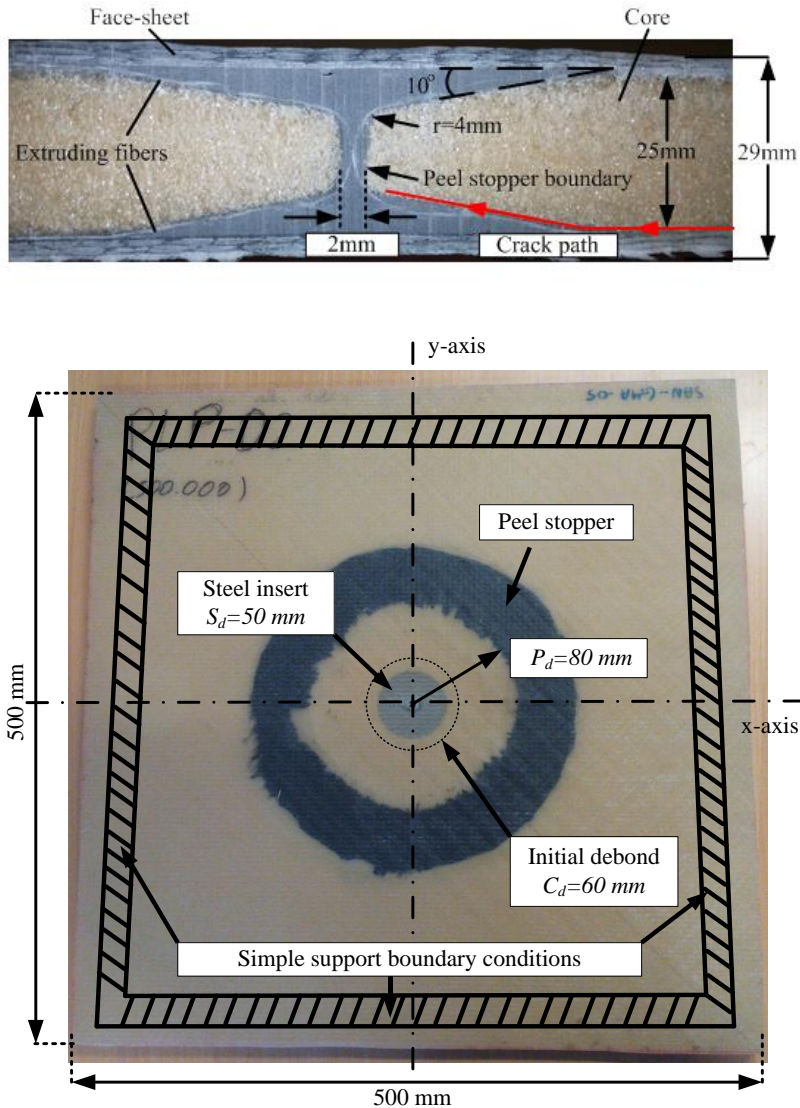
Layout and dimensions of foam cored sandwich panel test specimens with embedded PU peel stopper.
